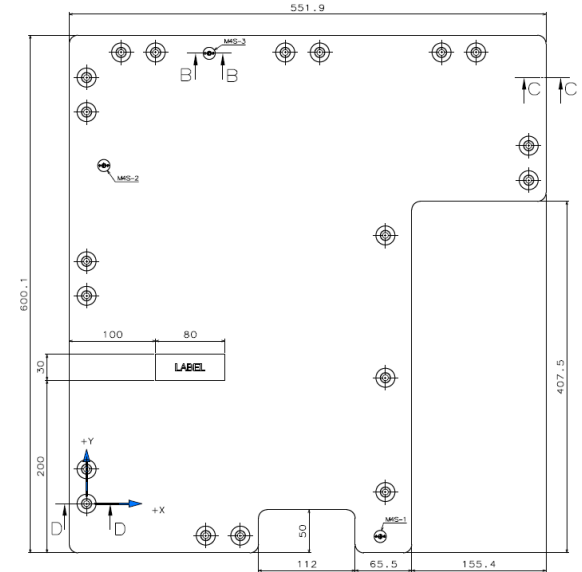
Design of the DEM02 TPT panel assembly for co-curing.
